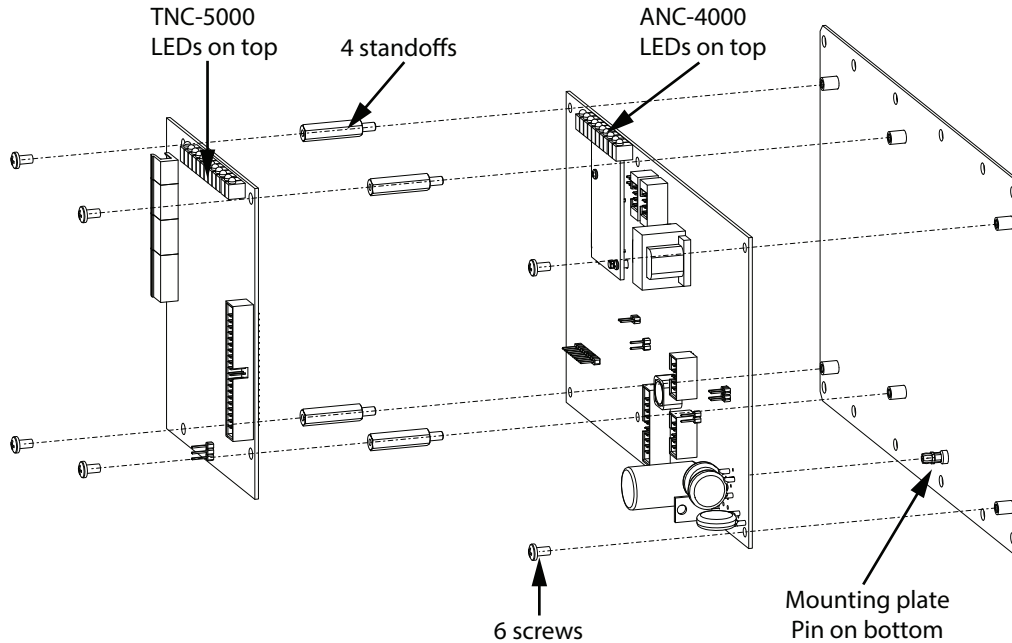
Mount ANC-4000 (and TNC-5000 if used) on Mounting Plate
